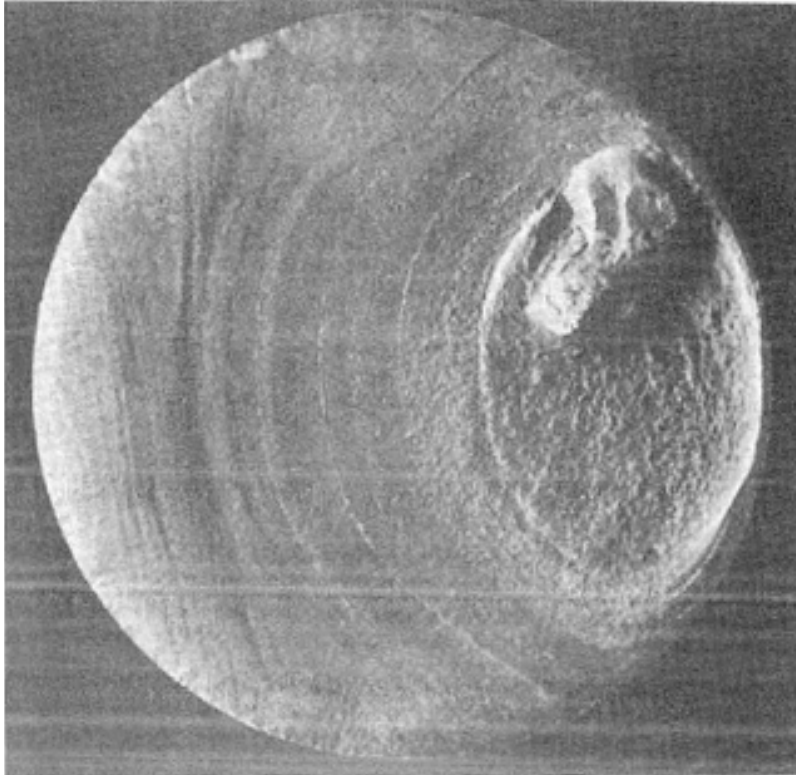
Typical clamshell markings on a fatigue fracture surface of a shaft. The fracture started at the left side of the bar and progressed to the right, where final failure occurred in a single cycle. Courtesy of W. H. Durrant.
